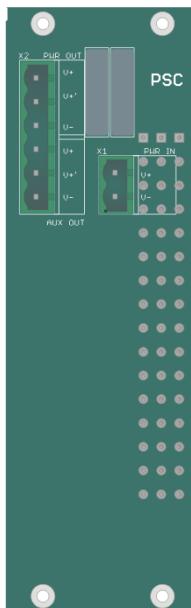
Rear side of the BP-PWR101-0, without cage clamp terminals
